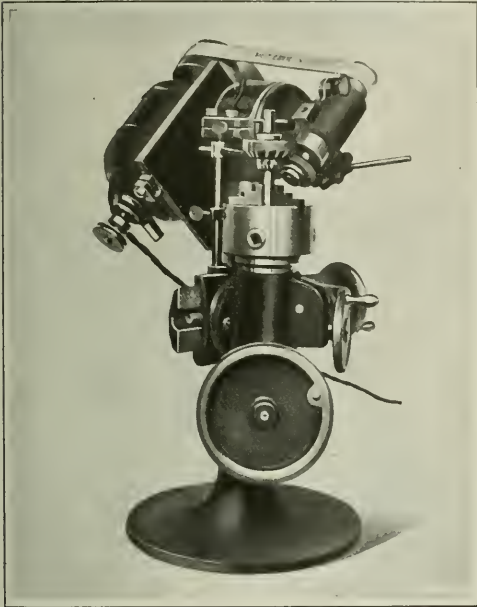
Grinding, Drilling and Turning Machine placed on the Market by the Ex-Cell-O Tool & Mfg. Co.
